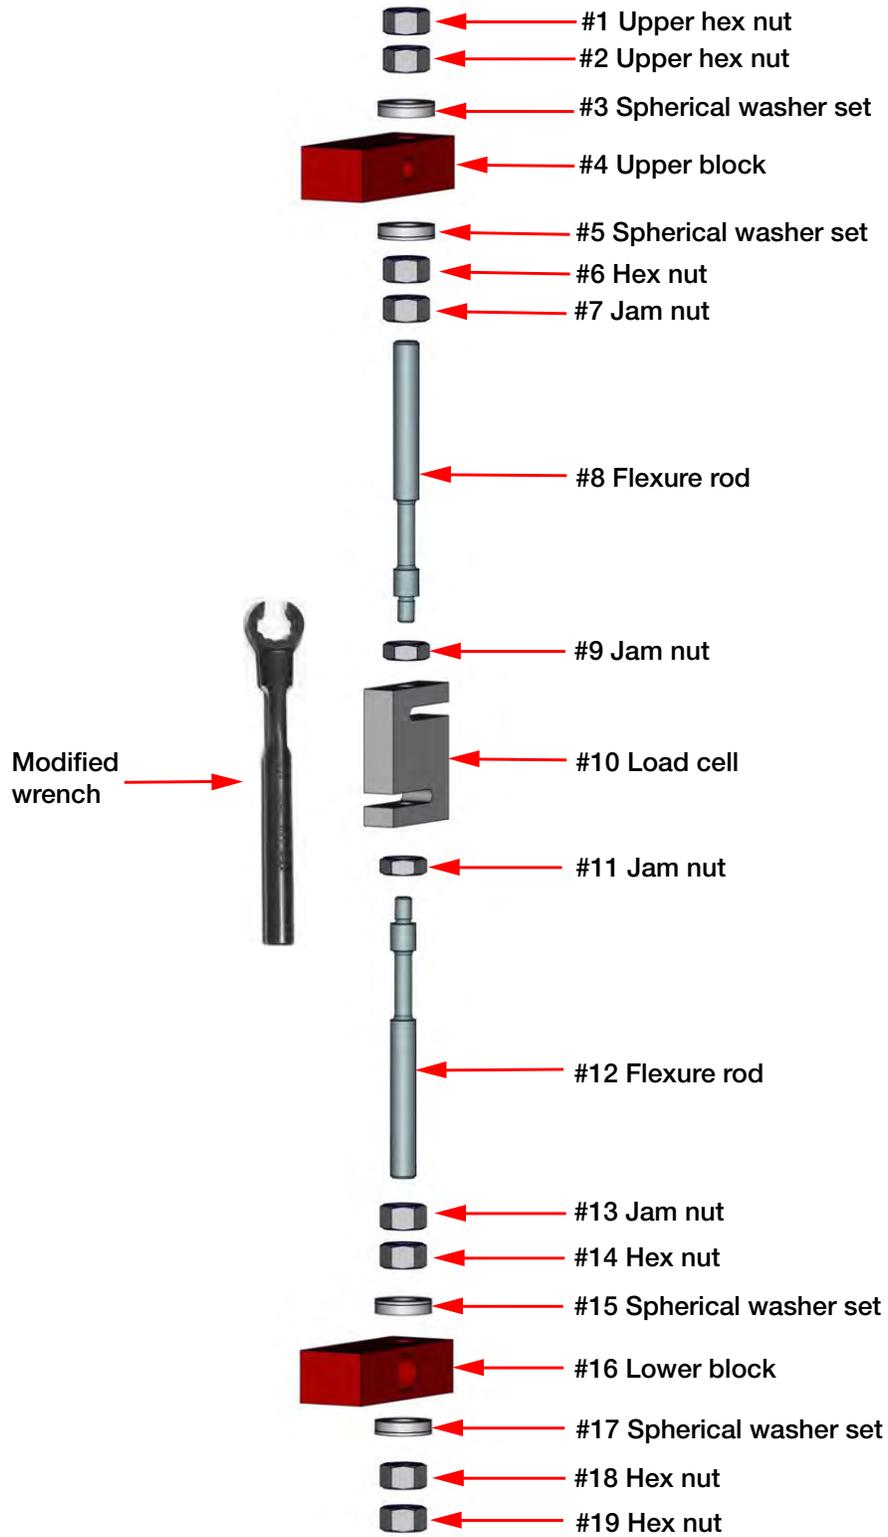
CLS-M Load Cell Assembly Parts Breakout
